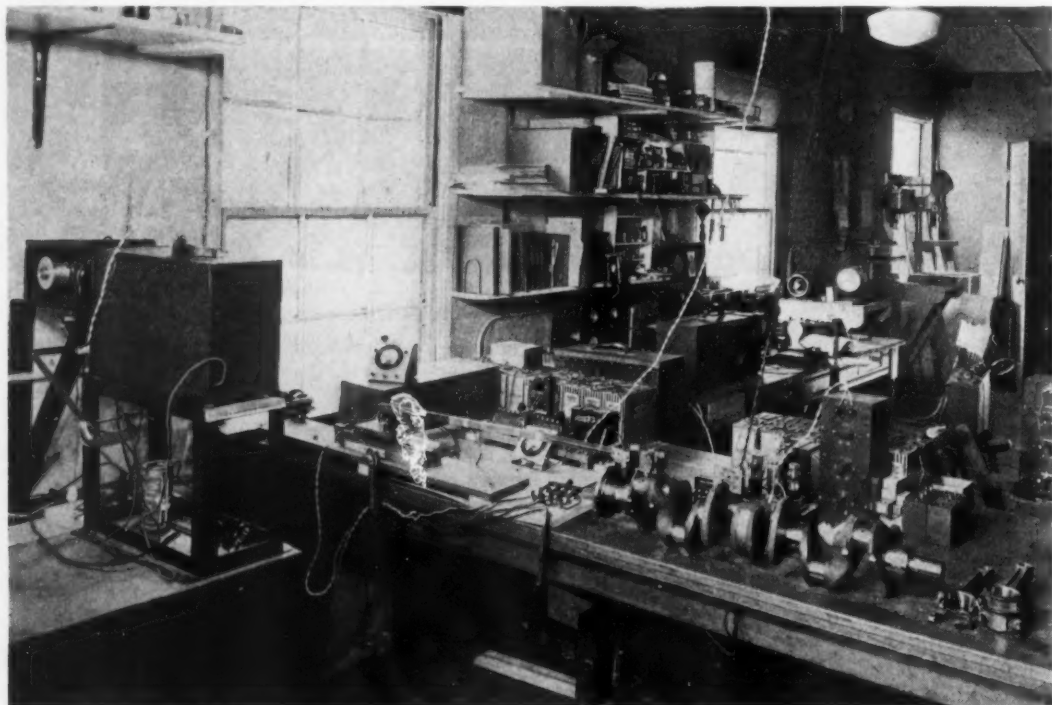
SETUP FOR MEASURING BEARING SURFACES ON CRANKSHAFT
